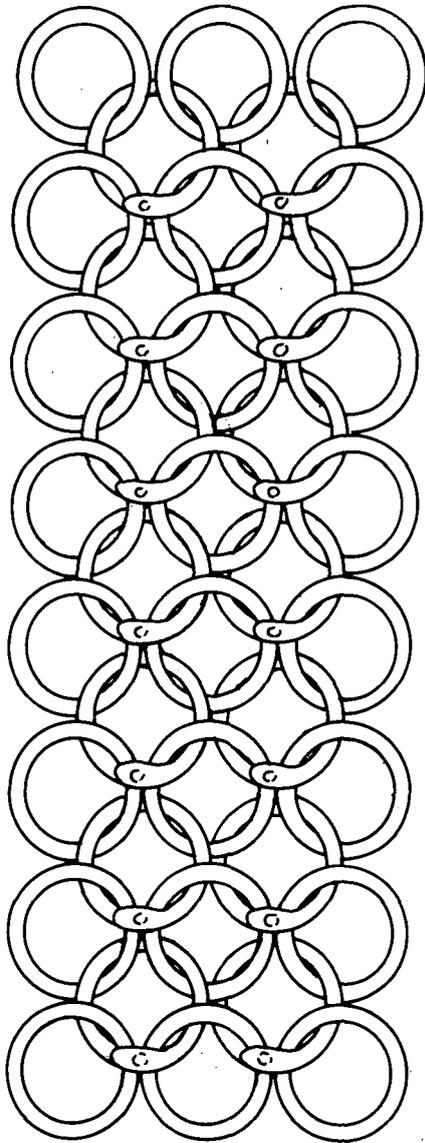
Schematic diagram of the 4 → 1 construction of the mail tunic, involving riveted and welded links.
